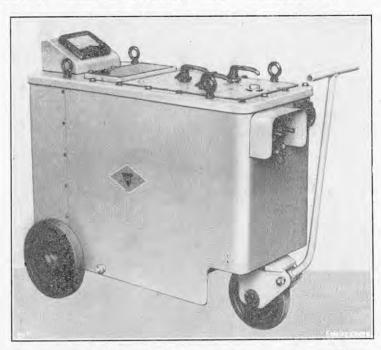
250/300-Ampere Arc-Welding Transformer Set; Murex Welding Processes, Limited.
